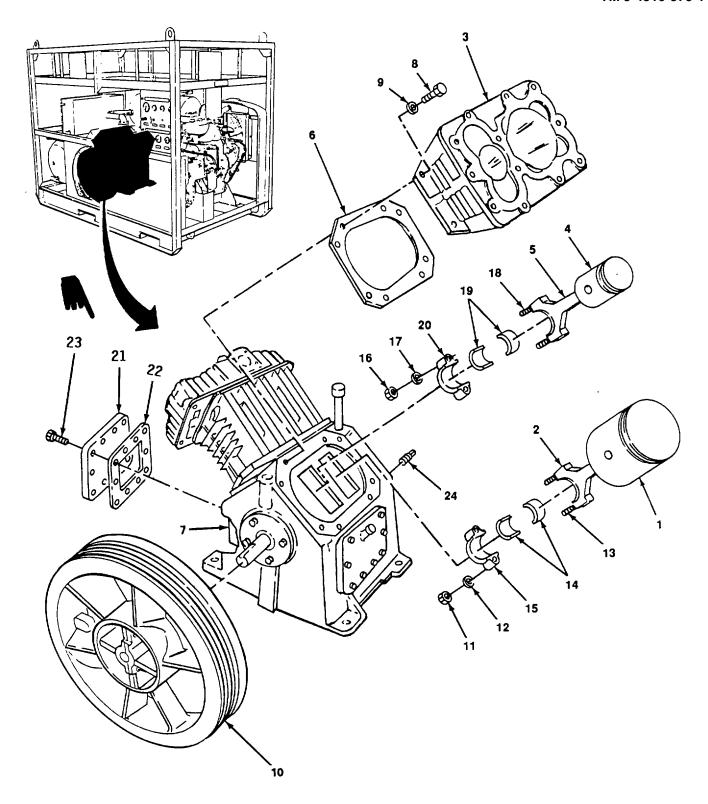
Compressor Pistons, Connecting Rods and Bearings, Installation.
